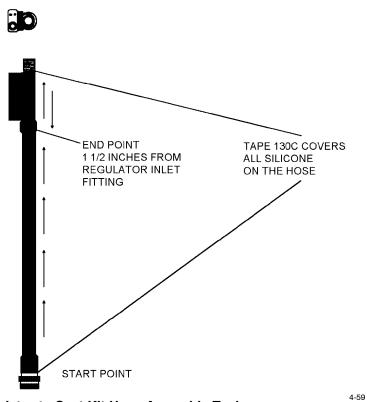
Unmodified Regulator to Seat Kit Hose Assembly Taping
